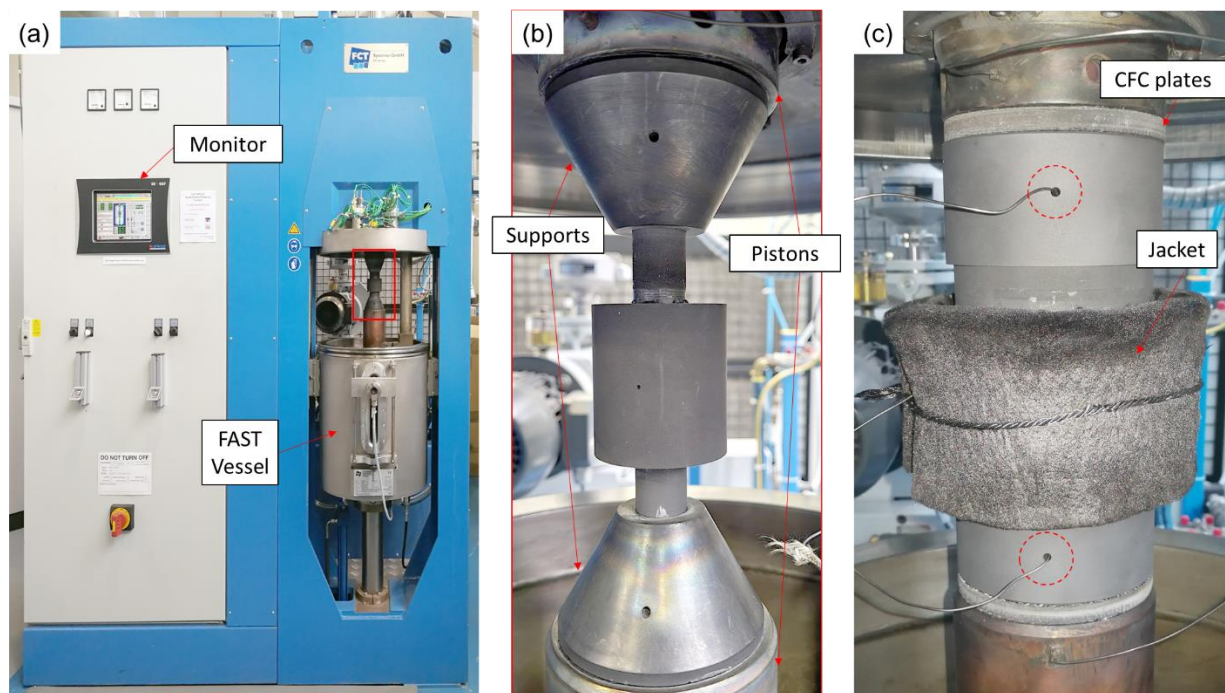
Photograph of (a) the FAST machine at the University of Sheffield, (b) the graphite tooling of a 20mm mould inside the FAST vessel and (c) the graphite tools for a 60mm mould inside the FAST vessel with the corresponding felt jacket and CFC plates.
